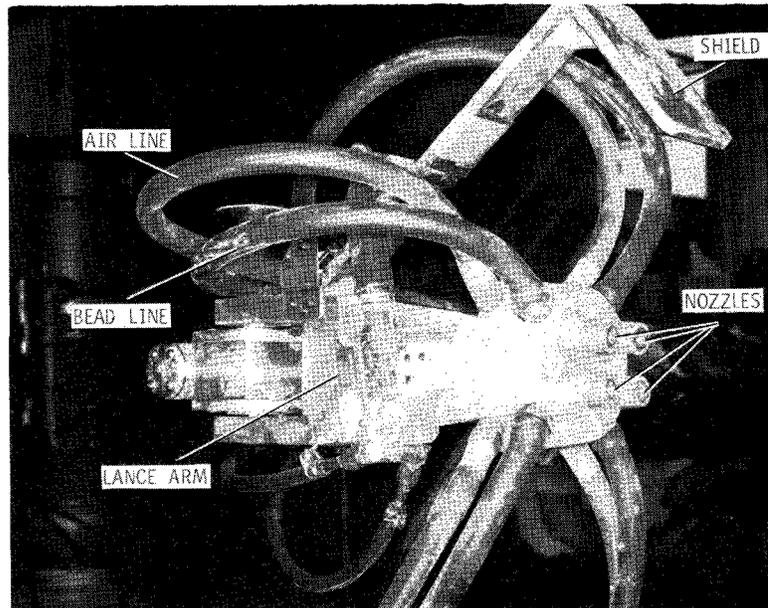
Multiple-nozzle assembly for glass-bead peening.
